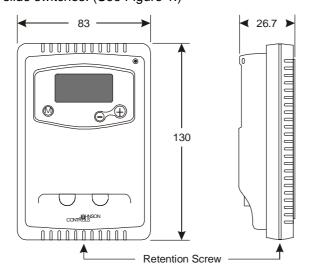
T6000 Series Thermostat Dimensions, in. (mm)
